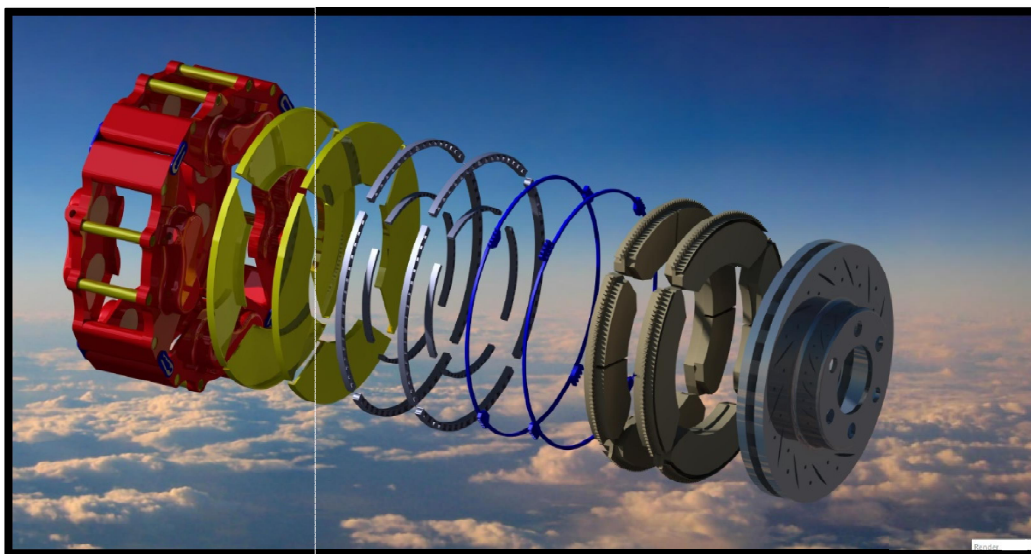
CAD Model of the dismantled view of the whole mechanism.
